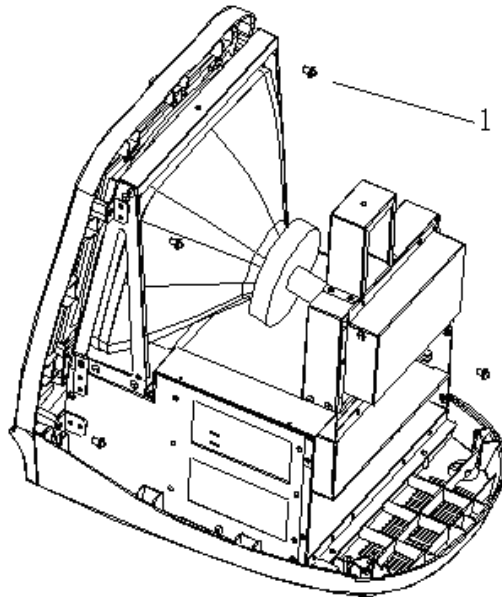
Sketch Map of Screws of Front Cover Disassembly
